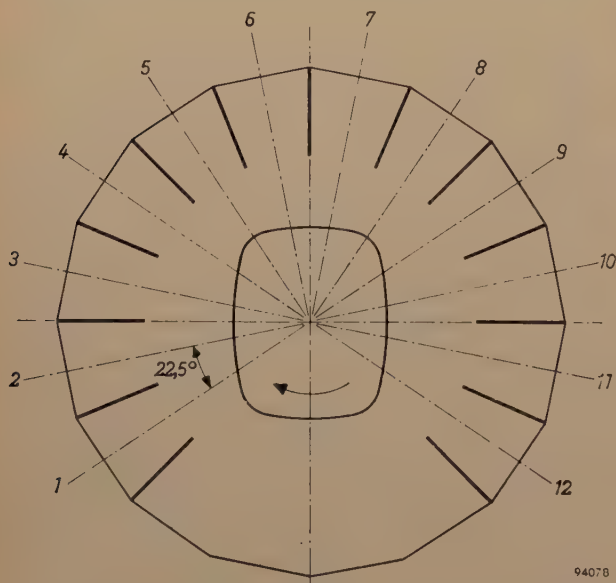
Arrangement of the burners 1 to 12 around the glass parts to be sealed. The workpieces are accessible from the front.
